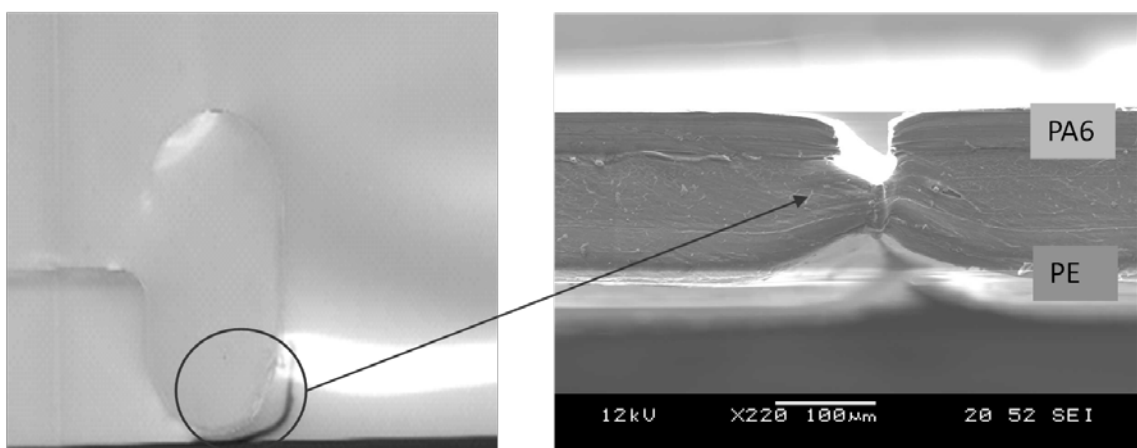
Cutting defects of PA6/PE film. (a) General view of cutting failure (b) Sectional view of uncut part (SEM)
